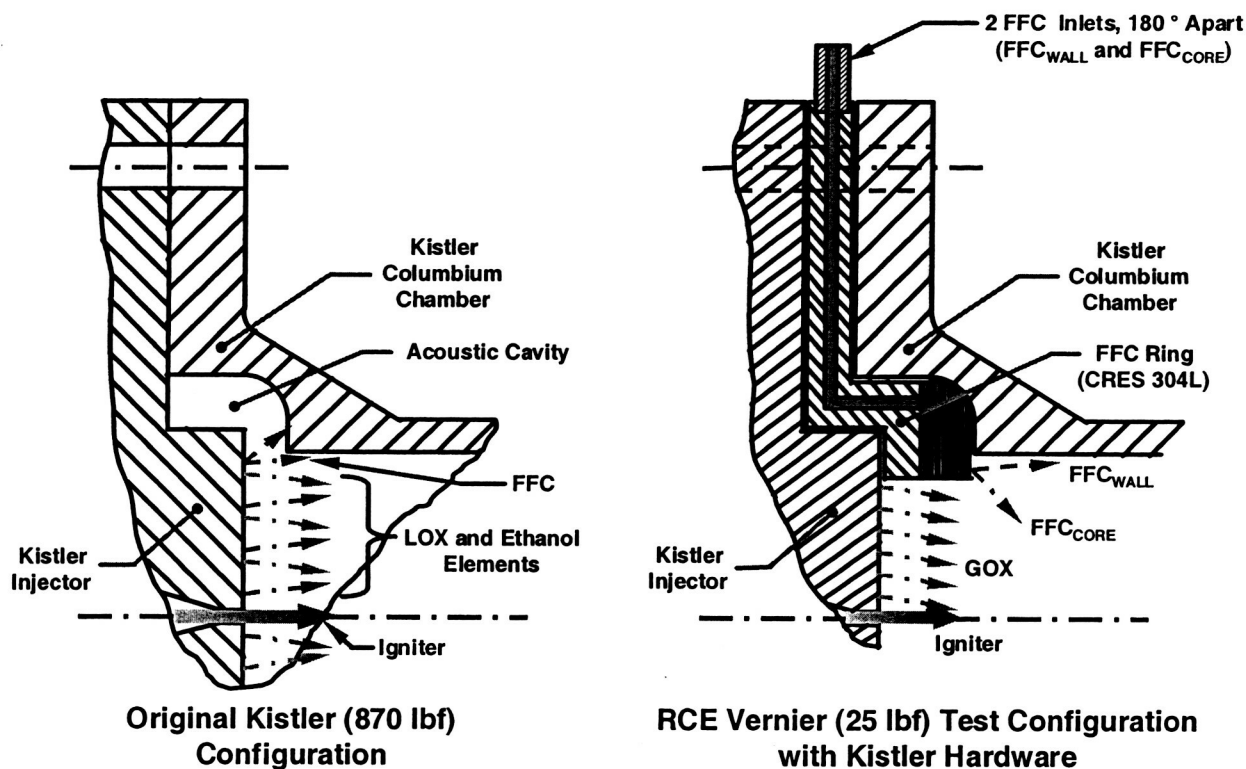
Special Test Equipment FFC Ring for Vernier Testing
